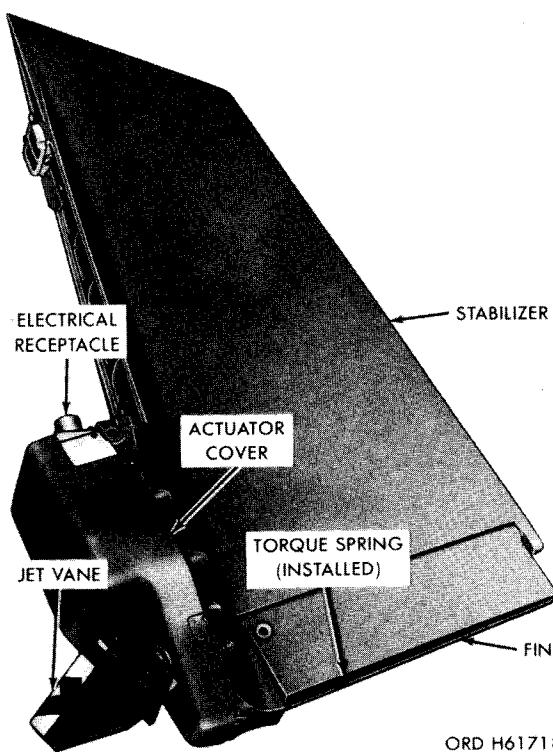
CONTROL SURFACE ASSEMBLY XM94.
